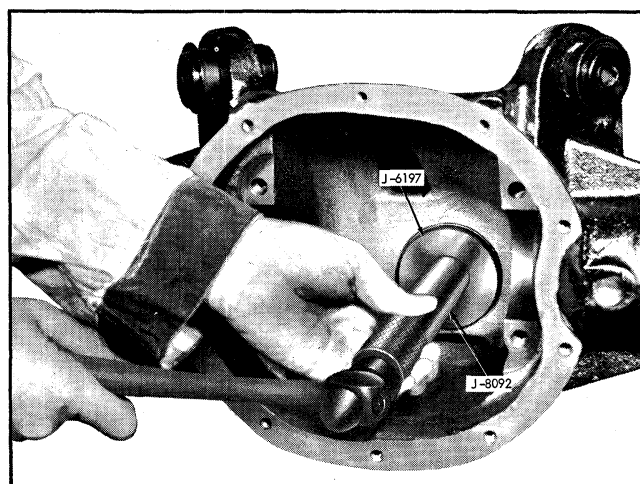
Installing Rear Pinion Bearing Outer Race
